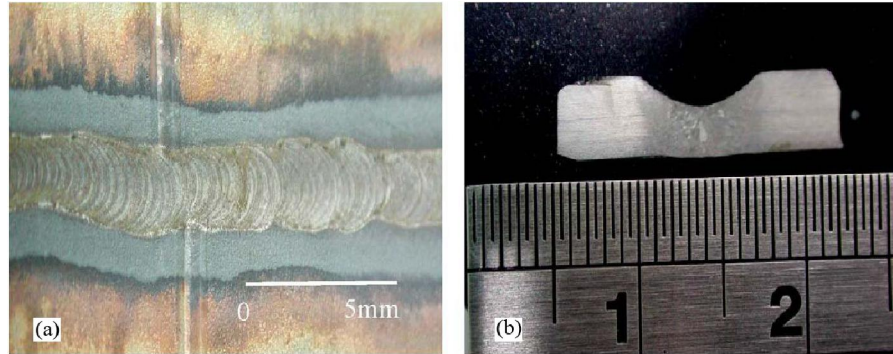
(a) Macrograph of a grooved weld at 6 O'clock location (overhead position). (b) Fusion zone section at 6 O'clock [9]
